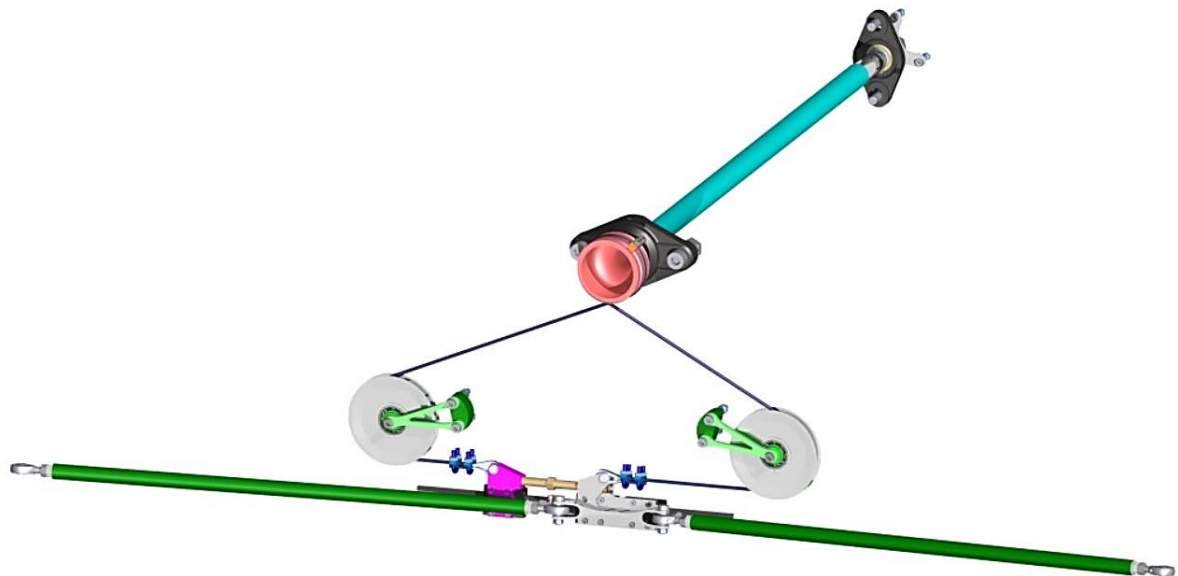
muc022 Steering System (isometric view) (Final CAD Drawing, CATIA V5)
